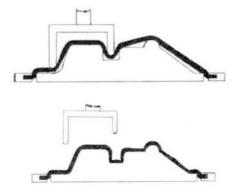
(b) Product of Plug Assist Forming- Plug Extended
